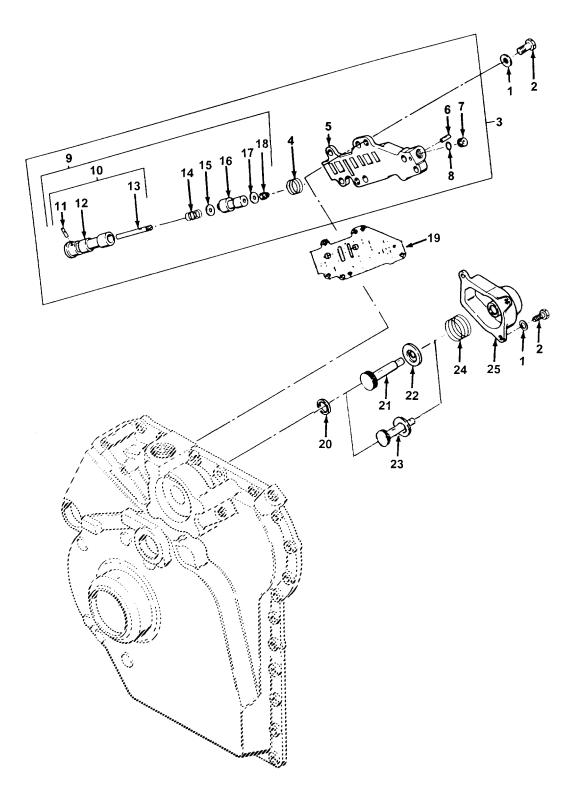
Right Brake Apply Valve Body and Brake Coolant Valve Body.
